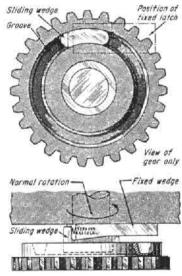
A fixed wedge and sliding wedge tend to disengage when the gear is turning clockwise. The wedges jam in the reverse direction.
